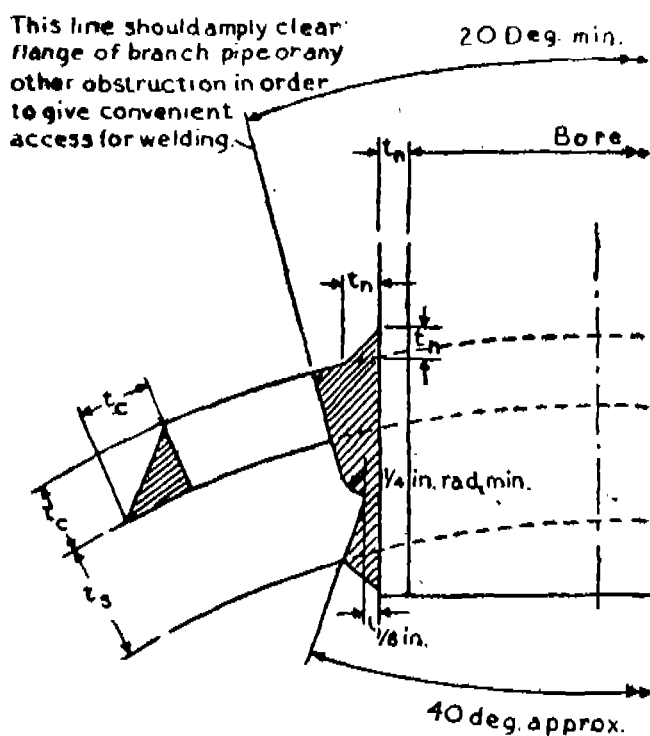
C. Welded-in standpipe or branch with compensating ring
